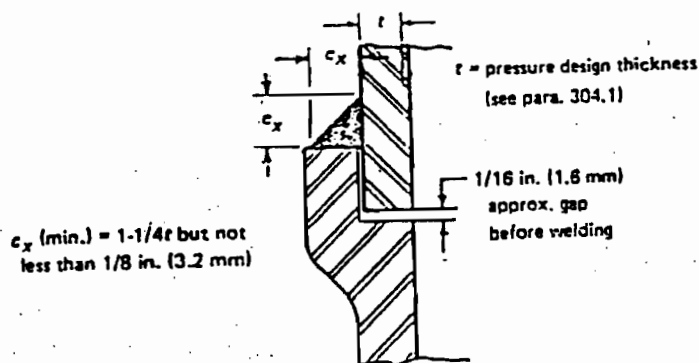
C MINIMUM WELDING DIMENSIONS FOR SOCKET WELDING COMPONENTS OTHER THAN FLANGES
